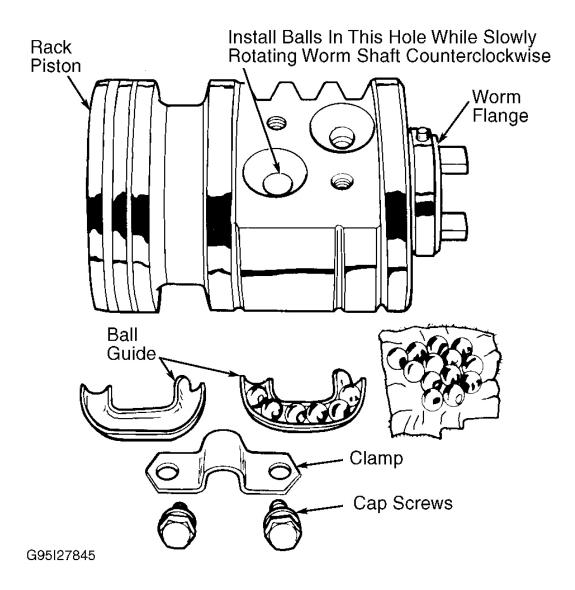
Installing Ball Bearing Into Rack Piston Courtesy of GENERAL MOTORS CORP.
